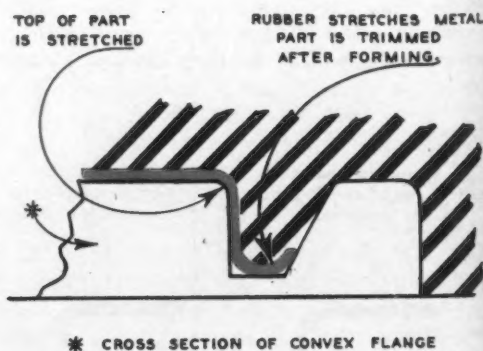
Another method for producing convex flange on thin stock is to have the rubber stretch the metal.
